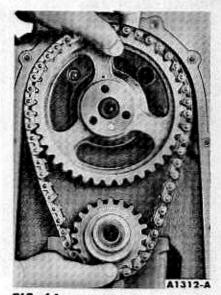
Camshaft Sprocket and Timing Chain Removal or Installation
